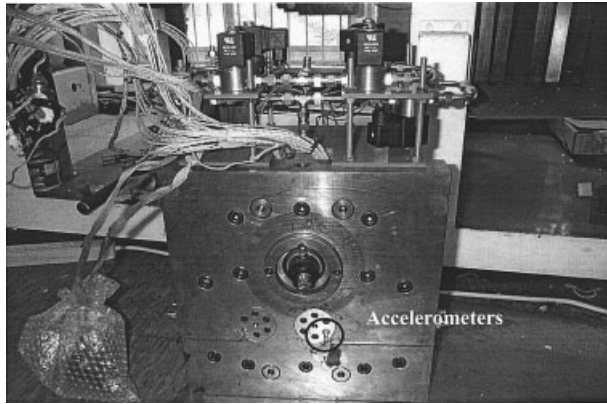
Pneumatic-driven system for a valve gate. The installation of the accelerometer is also identified.
